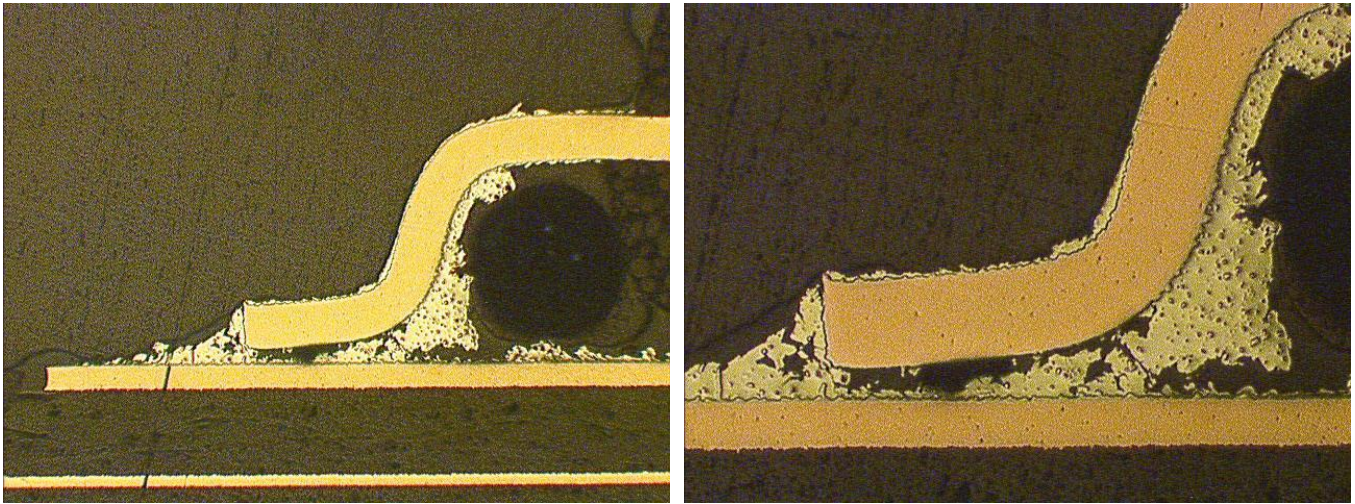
TQFP-144 Solder Joints, Board 49, Component U57, SAC305/Sn, Failed @ 1430 Cycles
